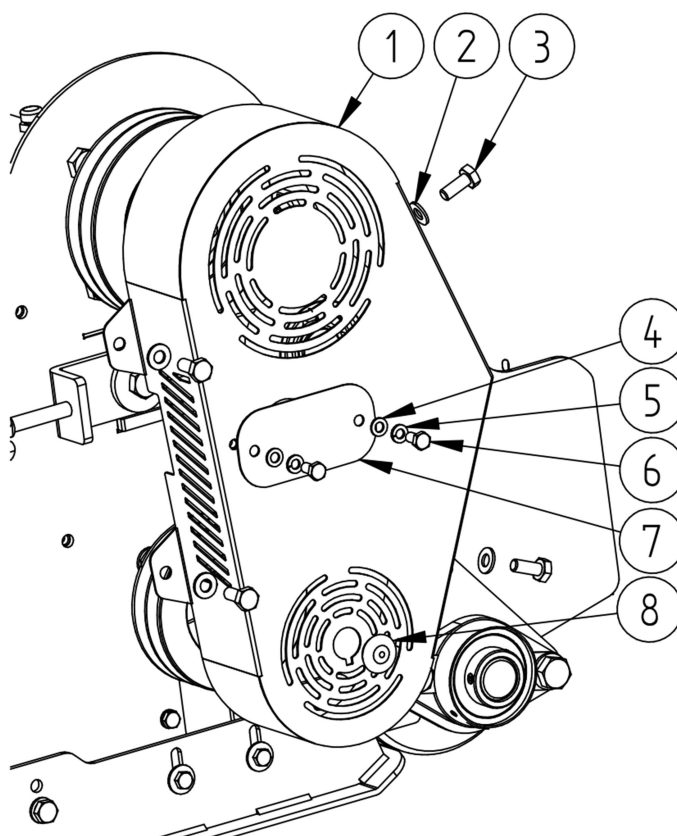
Complete v-belt gearbox cover ECO 100/135/150
